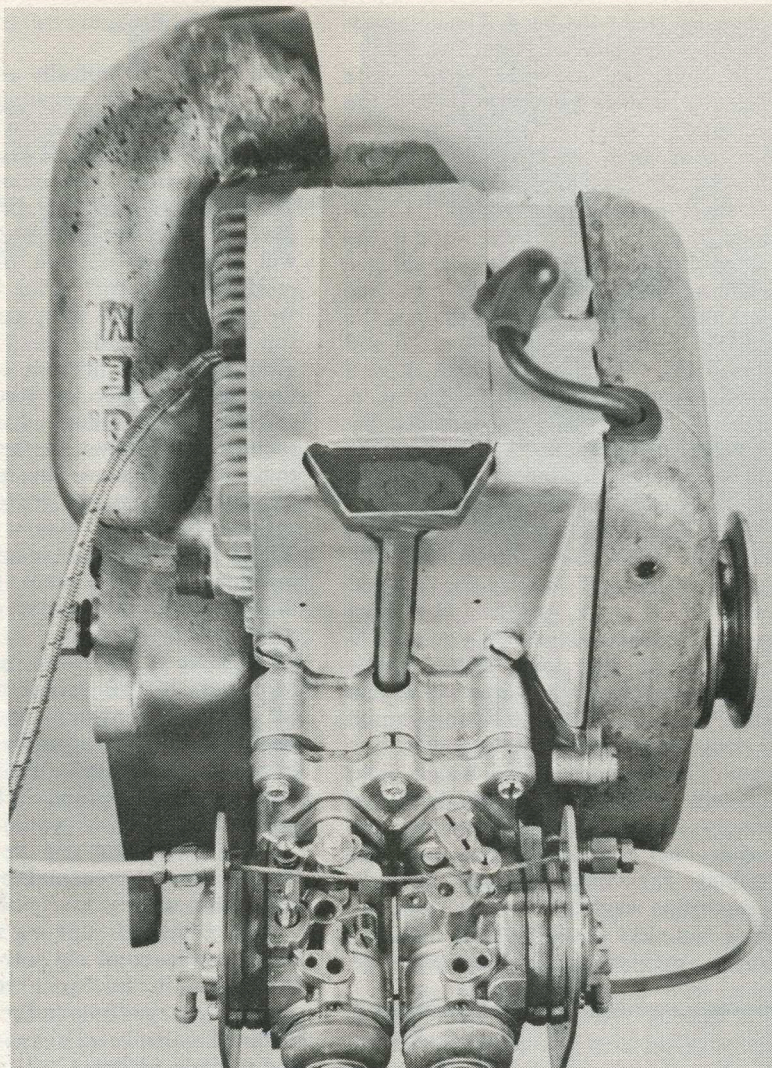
A reinforcement plate top and bottom will help hold the cylinder together. The restraining rod passes through the manifold between the reeds. The cooling shroud can be cut to fit over the top plate.
